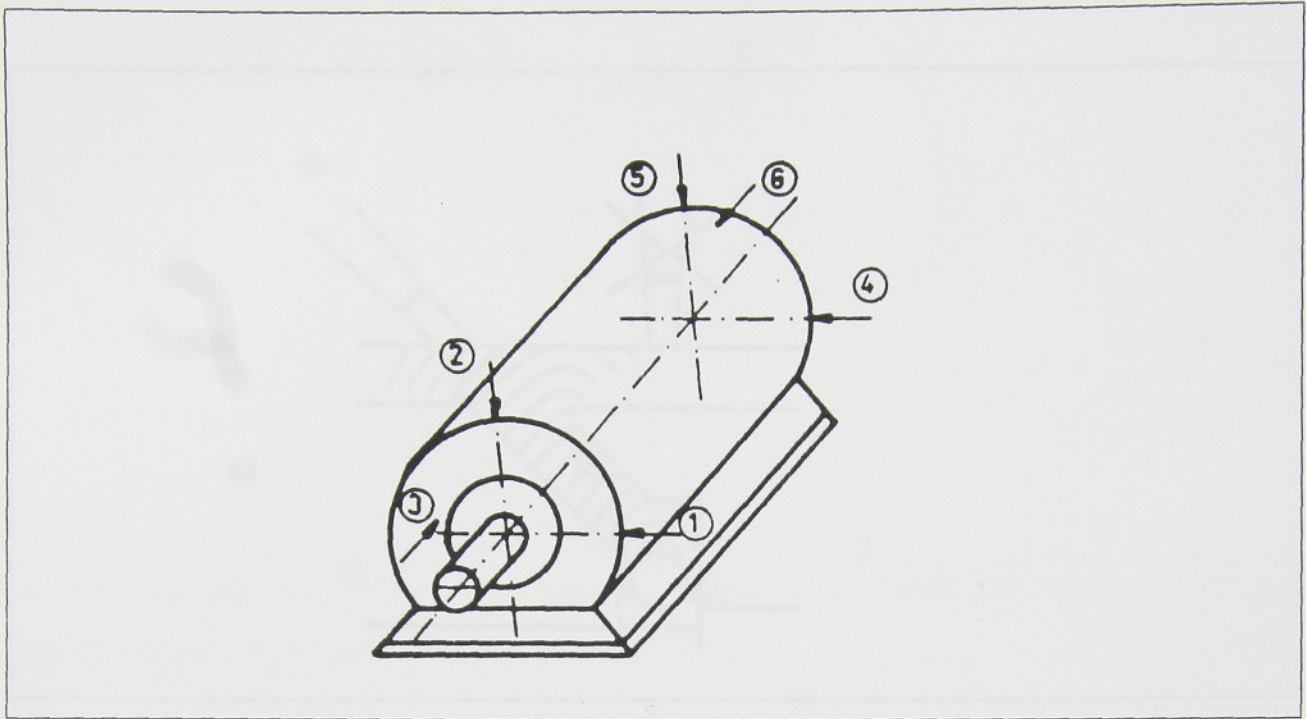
Measurement places in smoke ventilator electric motor according to ISO 2372.
